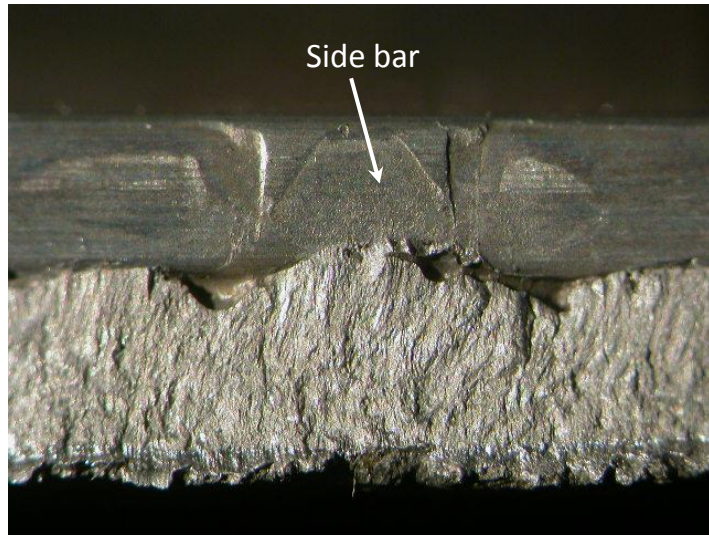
Surface fracture of the weld joint between the header and the side bars/ parting sheets
